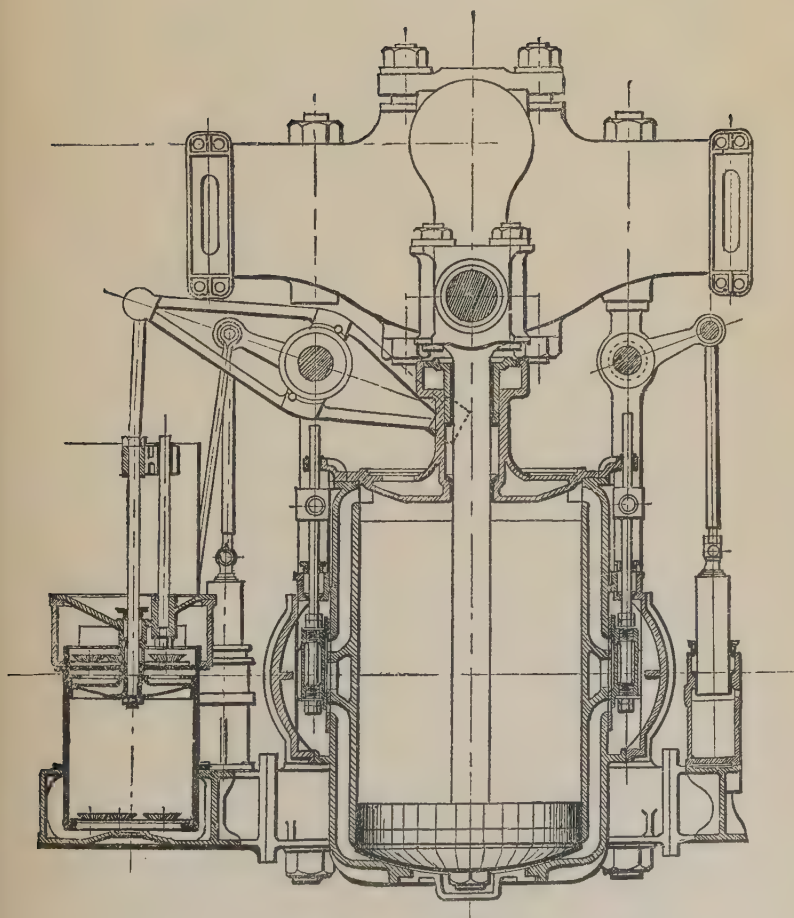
A.—Oscillating Engine—Section through Valve Boxes.
